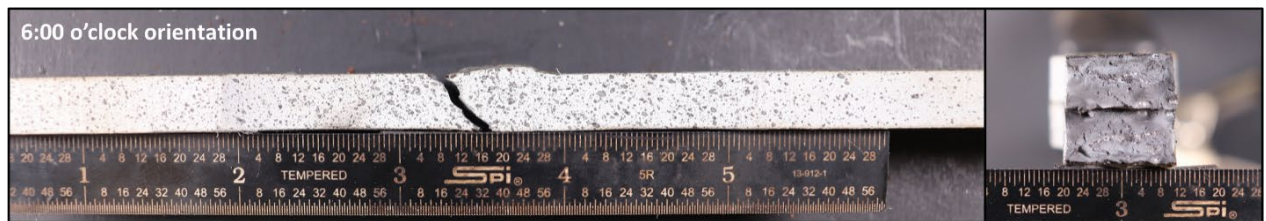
6:00 o'clock orientation cross girth weld tensile.
